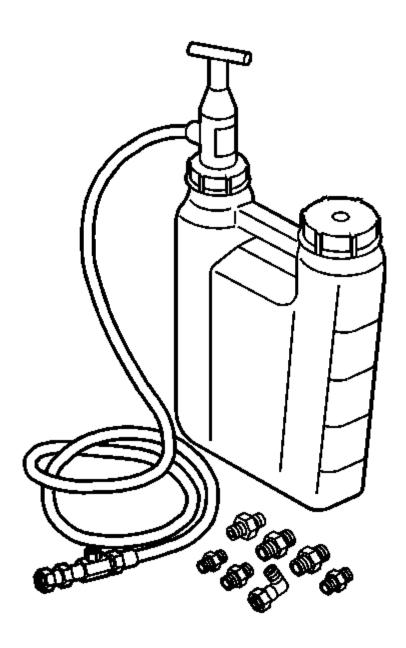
Identifying Engine Preluber J 45299 Courtesy of GENERAL MOTORS CORP.
